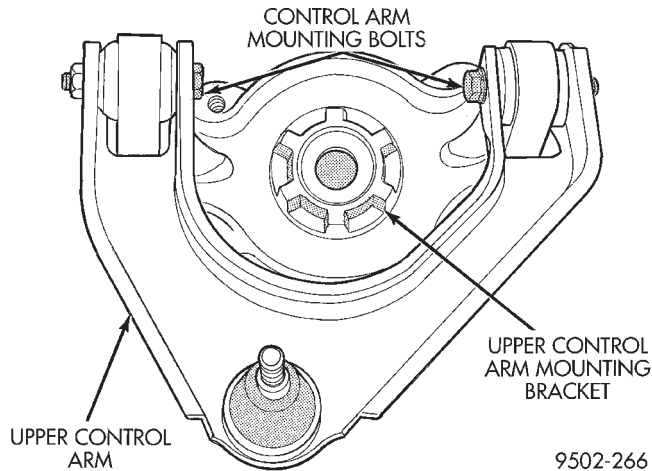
Upper Control Arm To Mounting Bracket Attachment
